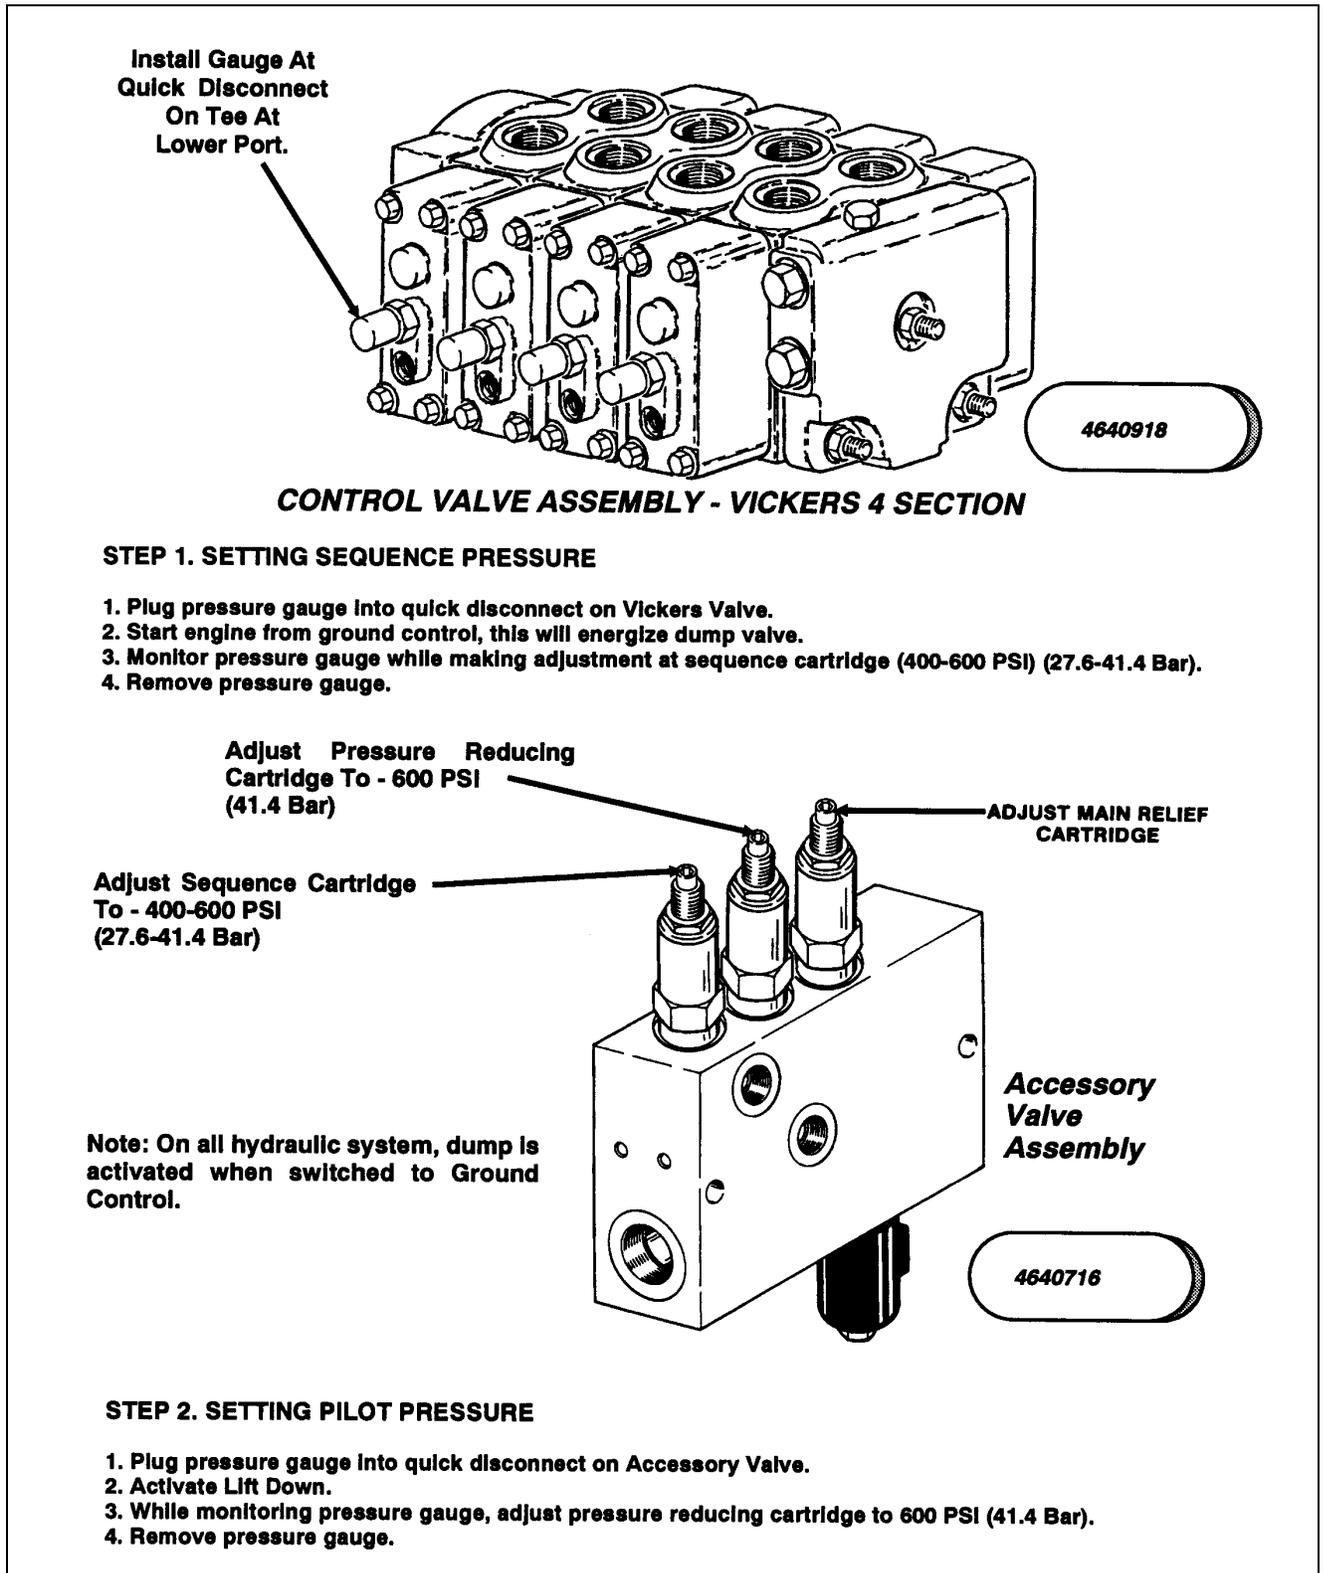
Vickers All Hydraulic Machines Pressure Settings (Sheet 1 of 4).
